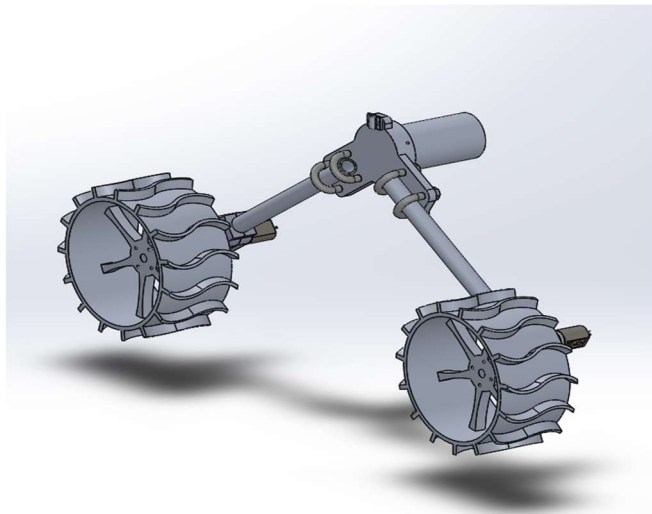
An isometric view of the micro rover’s Wheel – Leg CAD assembly that attaches the wheels and motors to the chassis.
